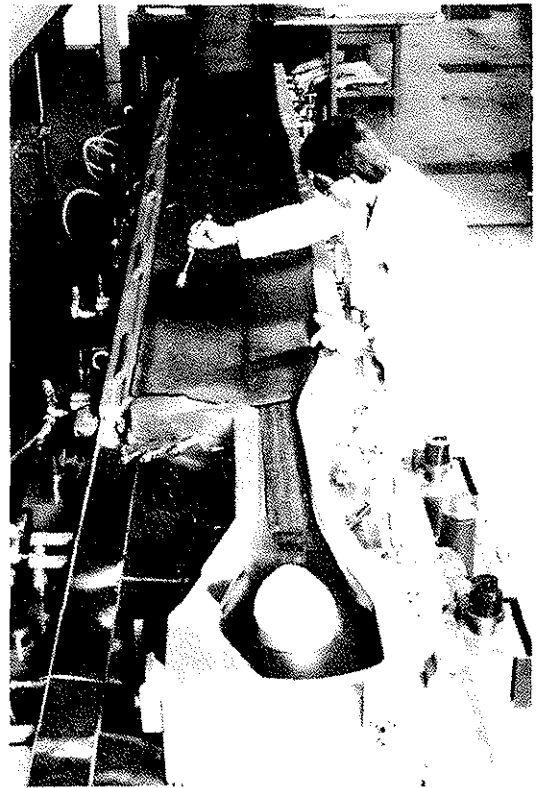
MAIN BLADE MANUFACTURING TOOL
